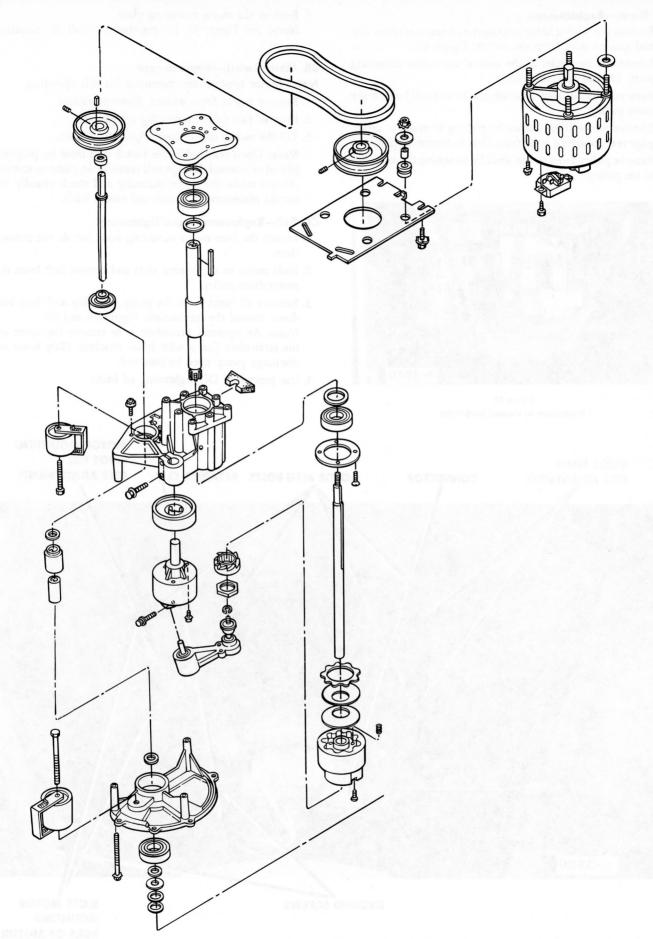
& 90 Exploded View of Drive Assembly and Mechanism
